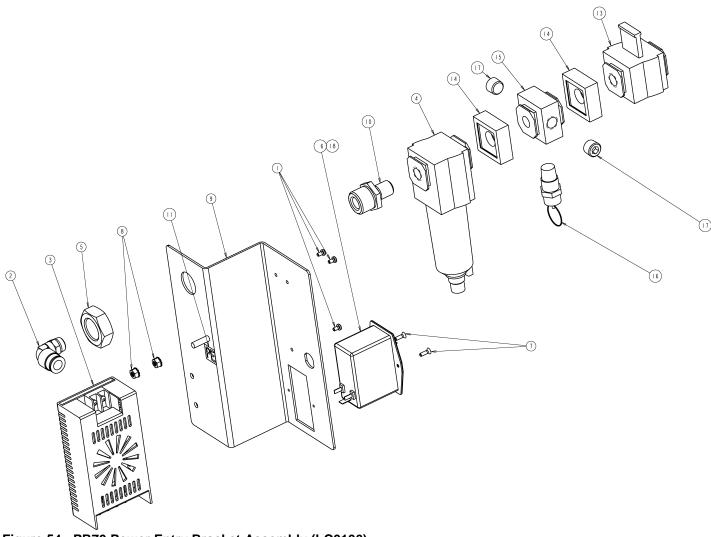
PR70 Power Entry Bracket Assembly (LC0106)
